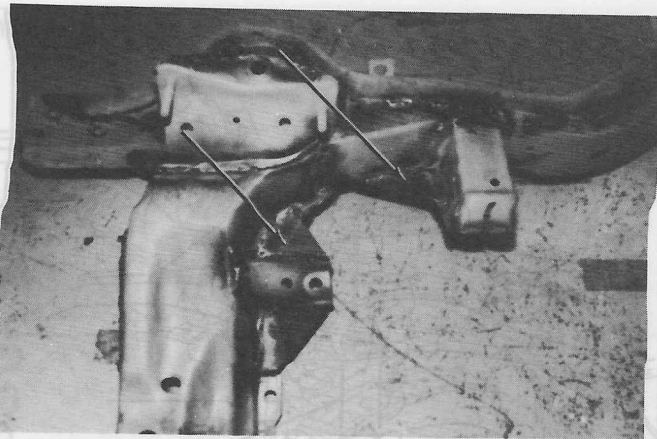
Weld gussets to crossmembers and lower control arm bracket.
